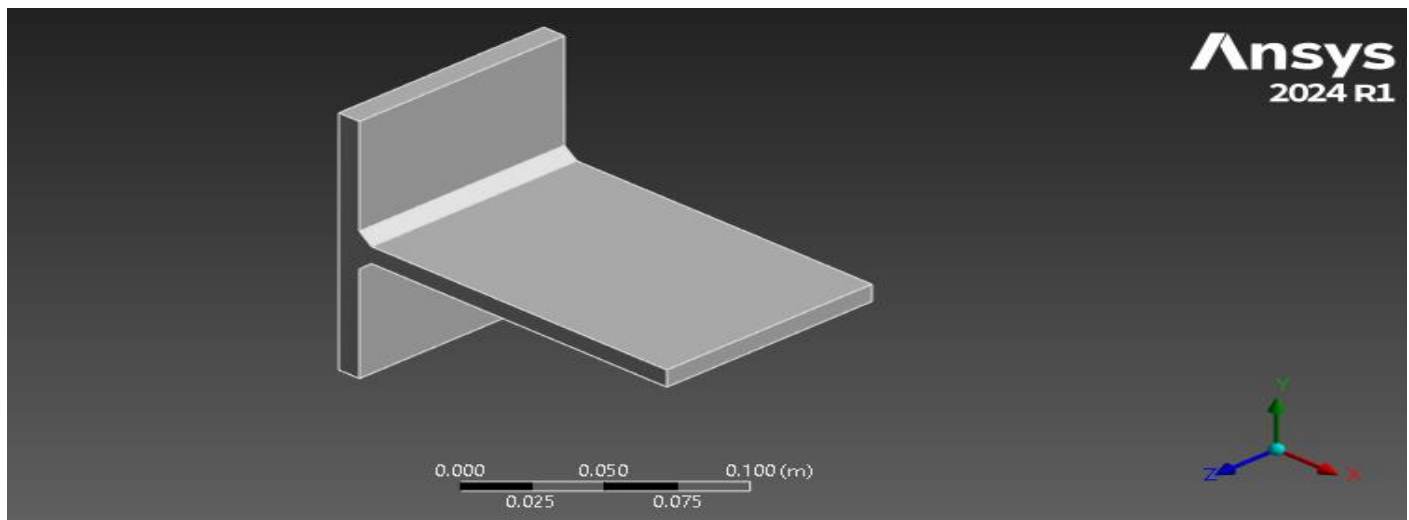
A capture screen from Ansys illustrating the modelled T_joint welding plate.
